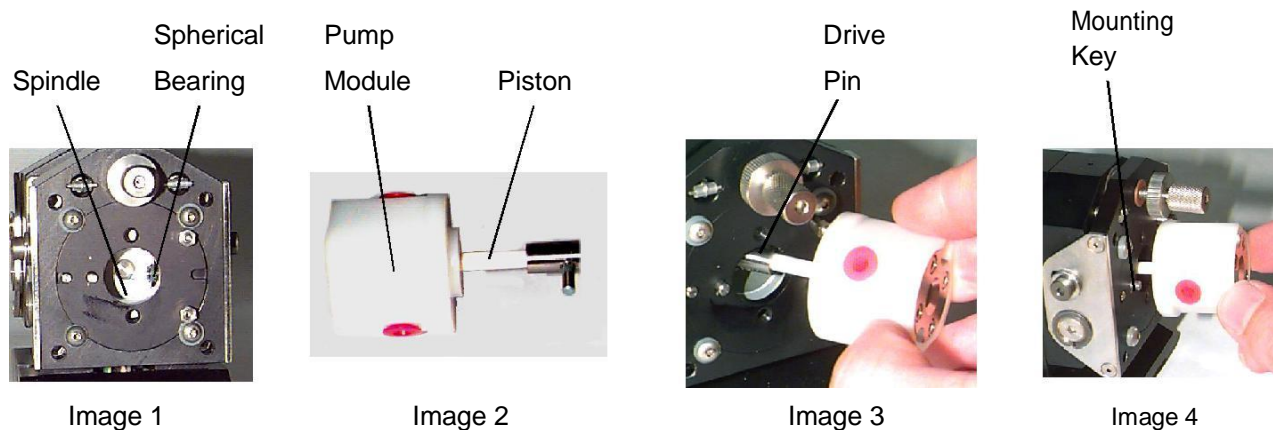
Micro Rotary Pump Module Assembly/Disassembly
